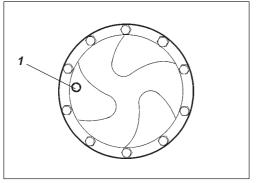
Oil level check – planetary gear (CA 262-362 Std.)
